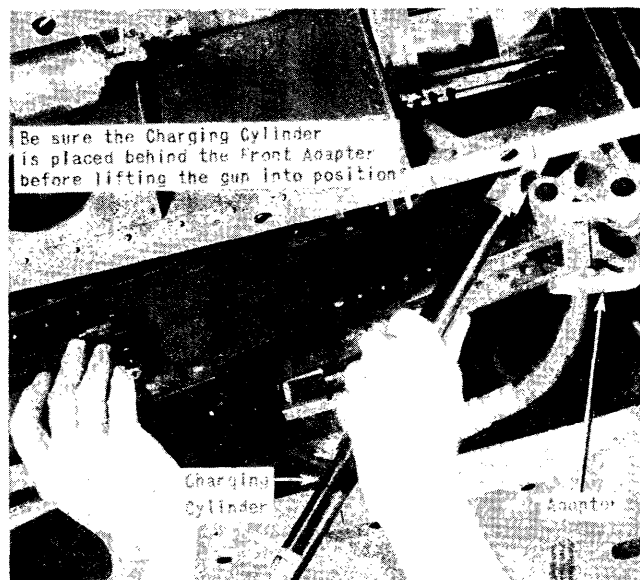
Proper Position of Charging Cylinder when Installing Gun
